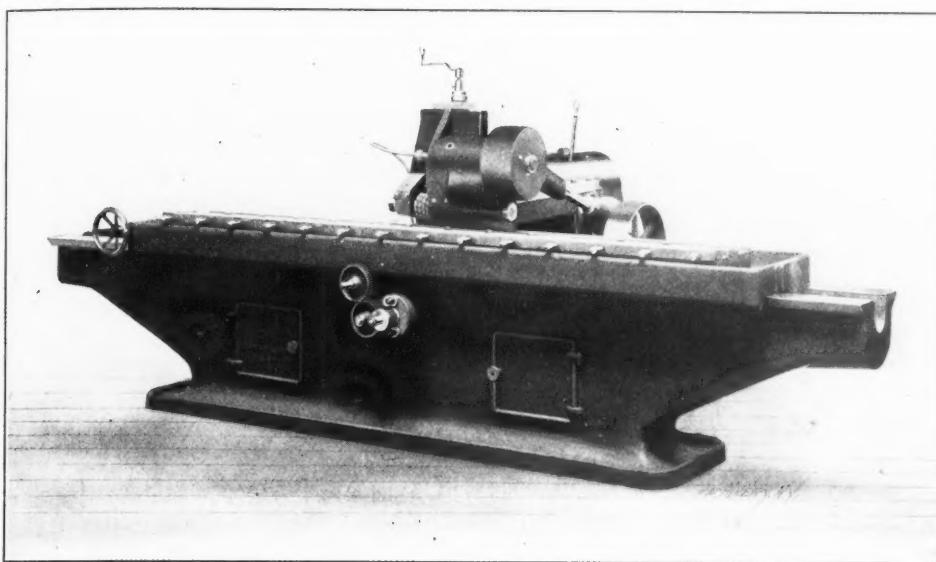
Rack-cutting Machine built in the Shops of the R. K. Le Blond Machine Tool Co.
